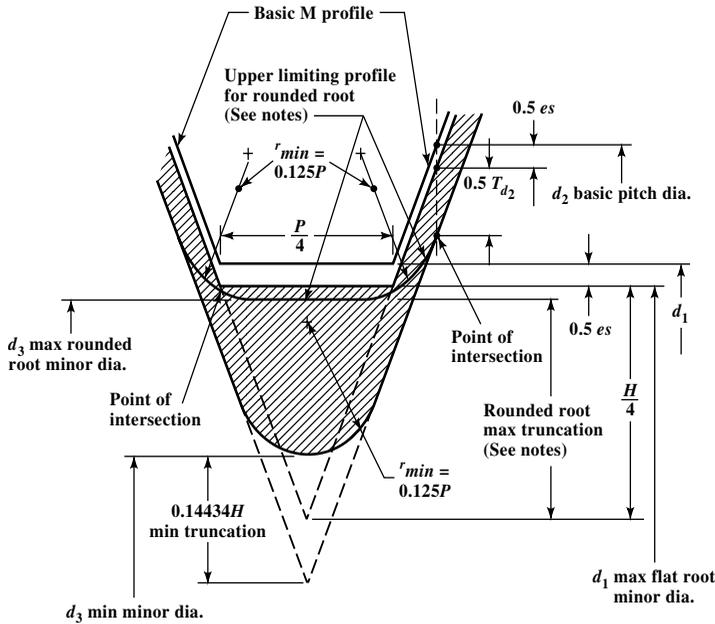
M Profile, External Thread Root, Upper and Lower Limiting Profiles for  $r_{min} = 0.125P$  and for Flat Root (Shown for Tolerance Position g)
